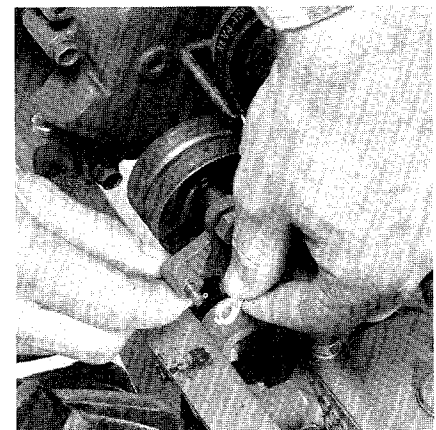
Installing the lower end of the Forward Clutch Cable.
